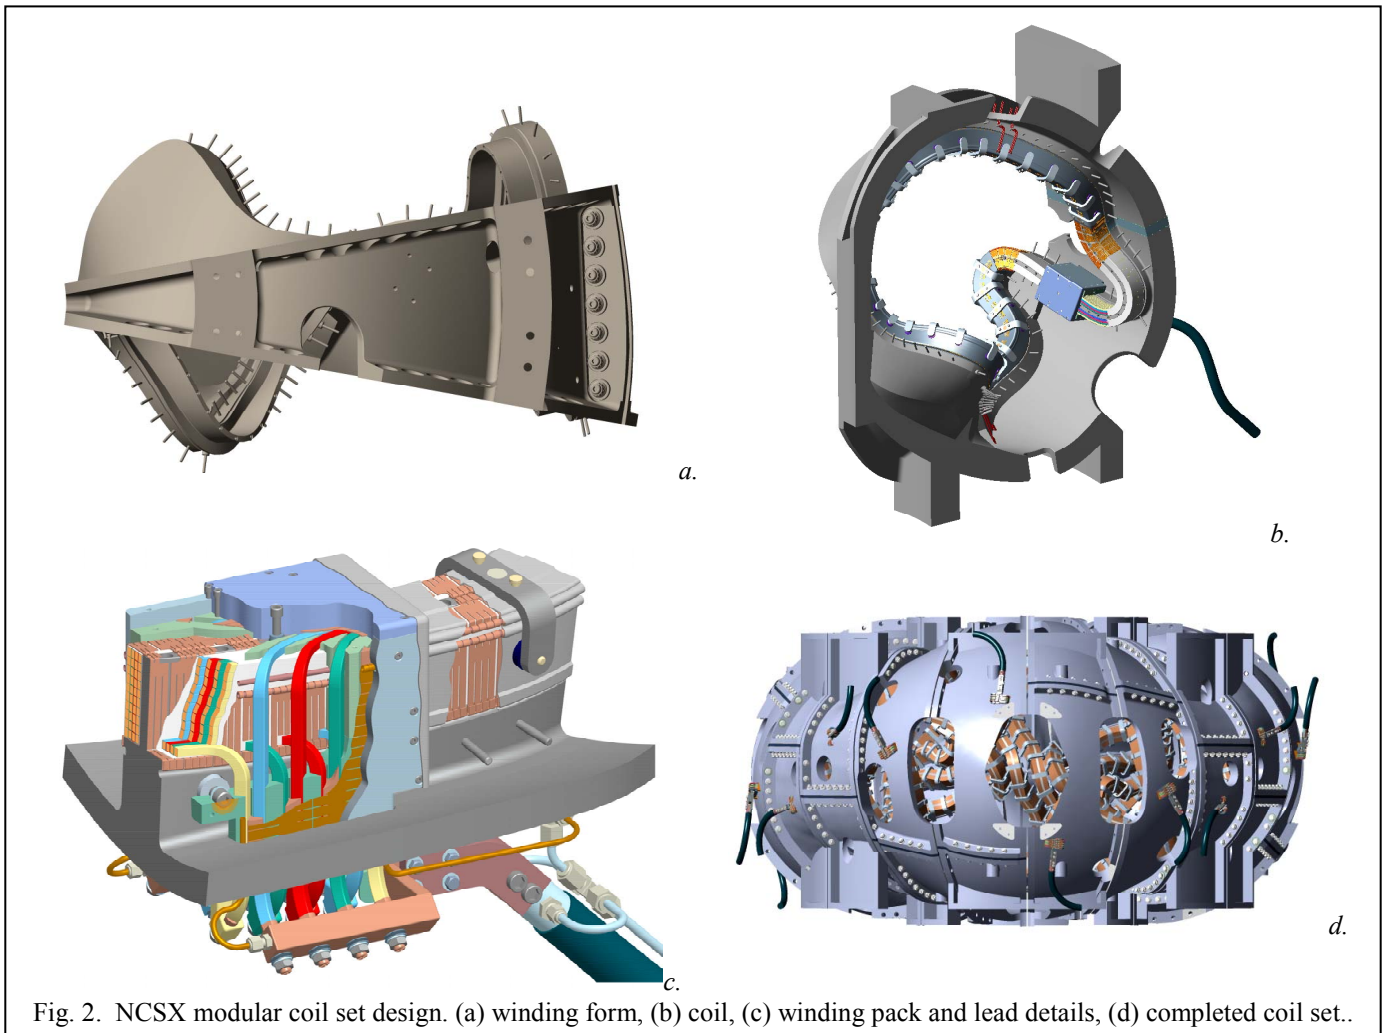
NCSX modular coil set design. (a) winding form, (b) coil, (c) winding pack and lead details, (d) completed coil set..
